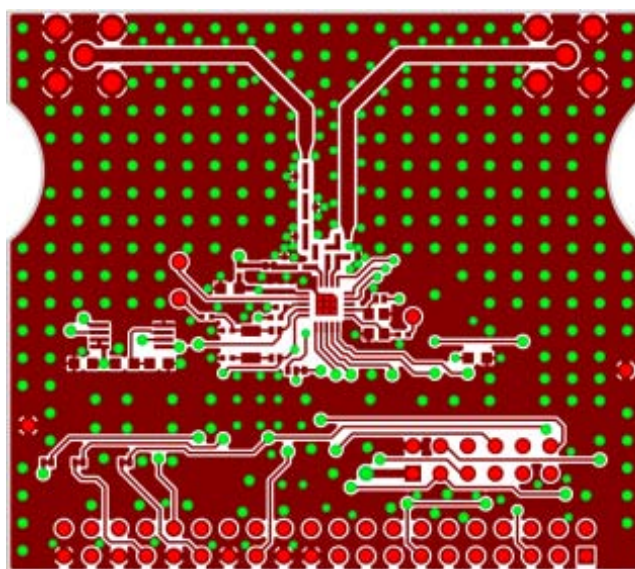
446x-TCExxBxxx RF Test Card PCB (Top Layer)
